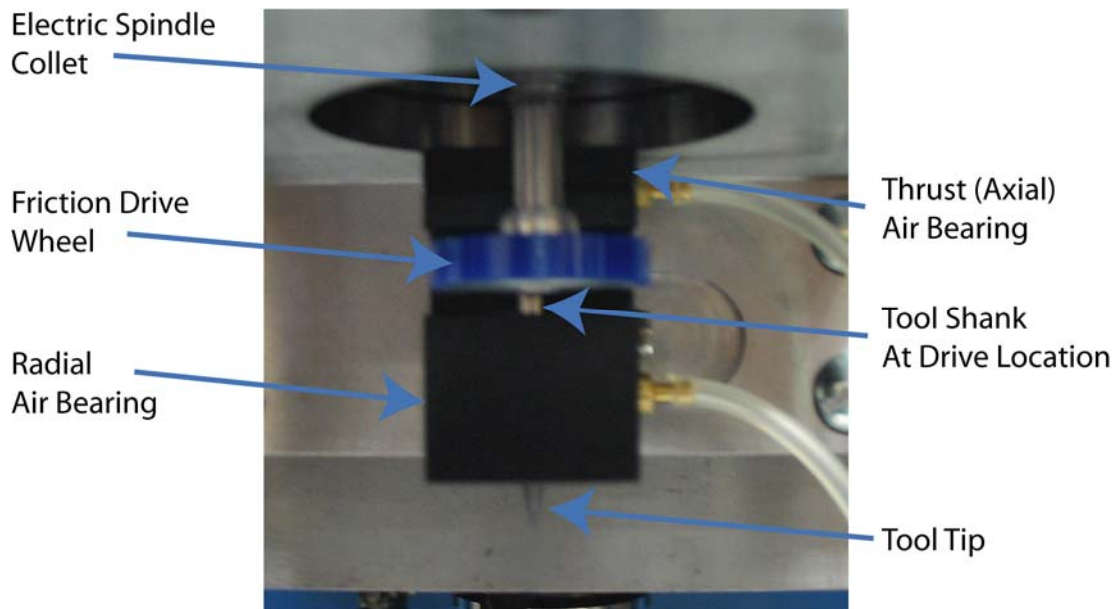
Friction Wheel Drives Tool Shank Supported Axially and Radially in Air Bearing
